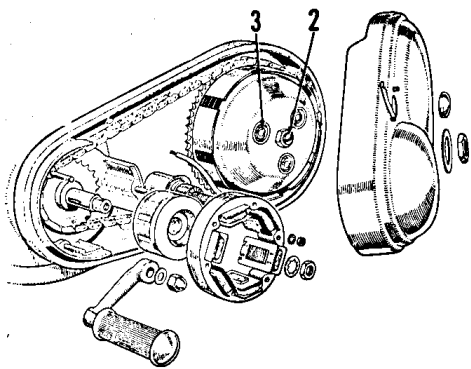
The clutch adjusting screw located under the primary chain cover on early models is shown at (2).
